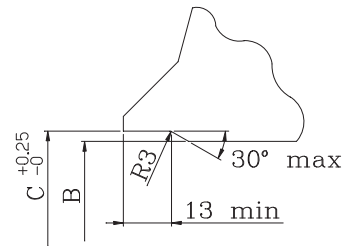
(c) Welding end detail for joint using continuous rectangular backing ring
